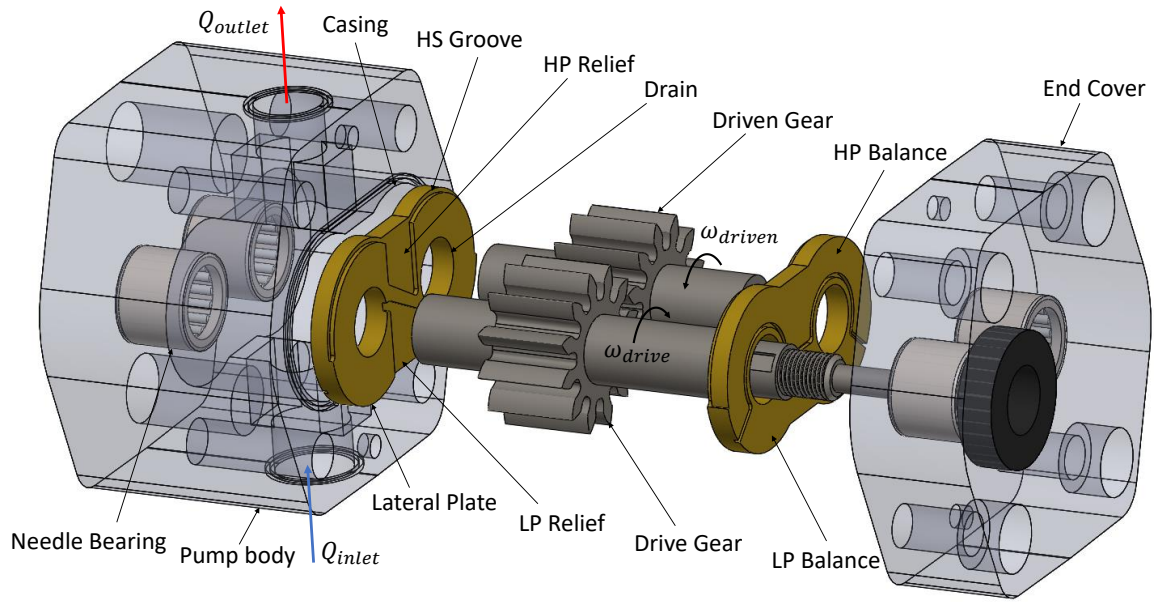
Exploded view of a typical pressure compensated external gear machine (Ref E3) during pumping
